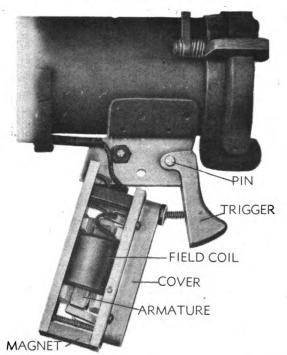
Firing Mechanism — Right Side View With Trigger Grips Removed
